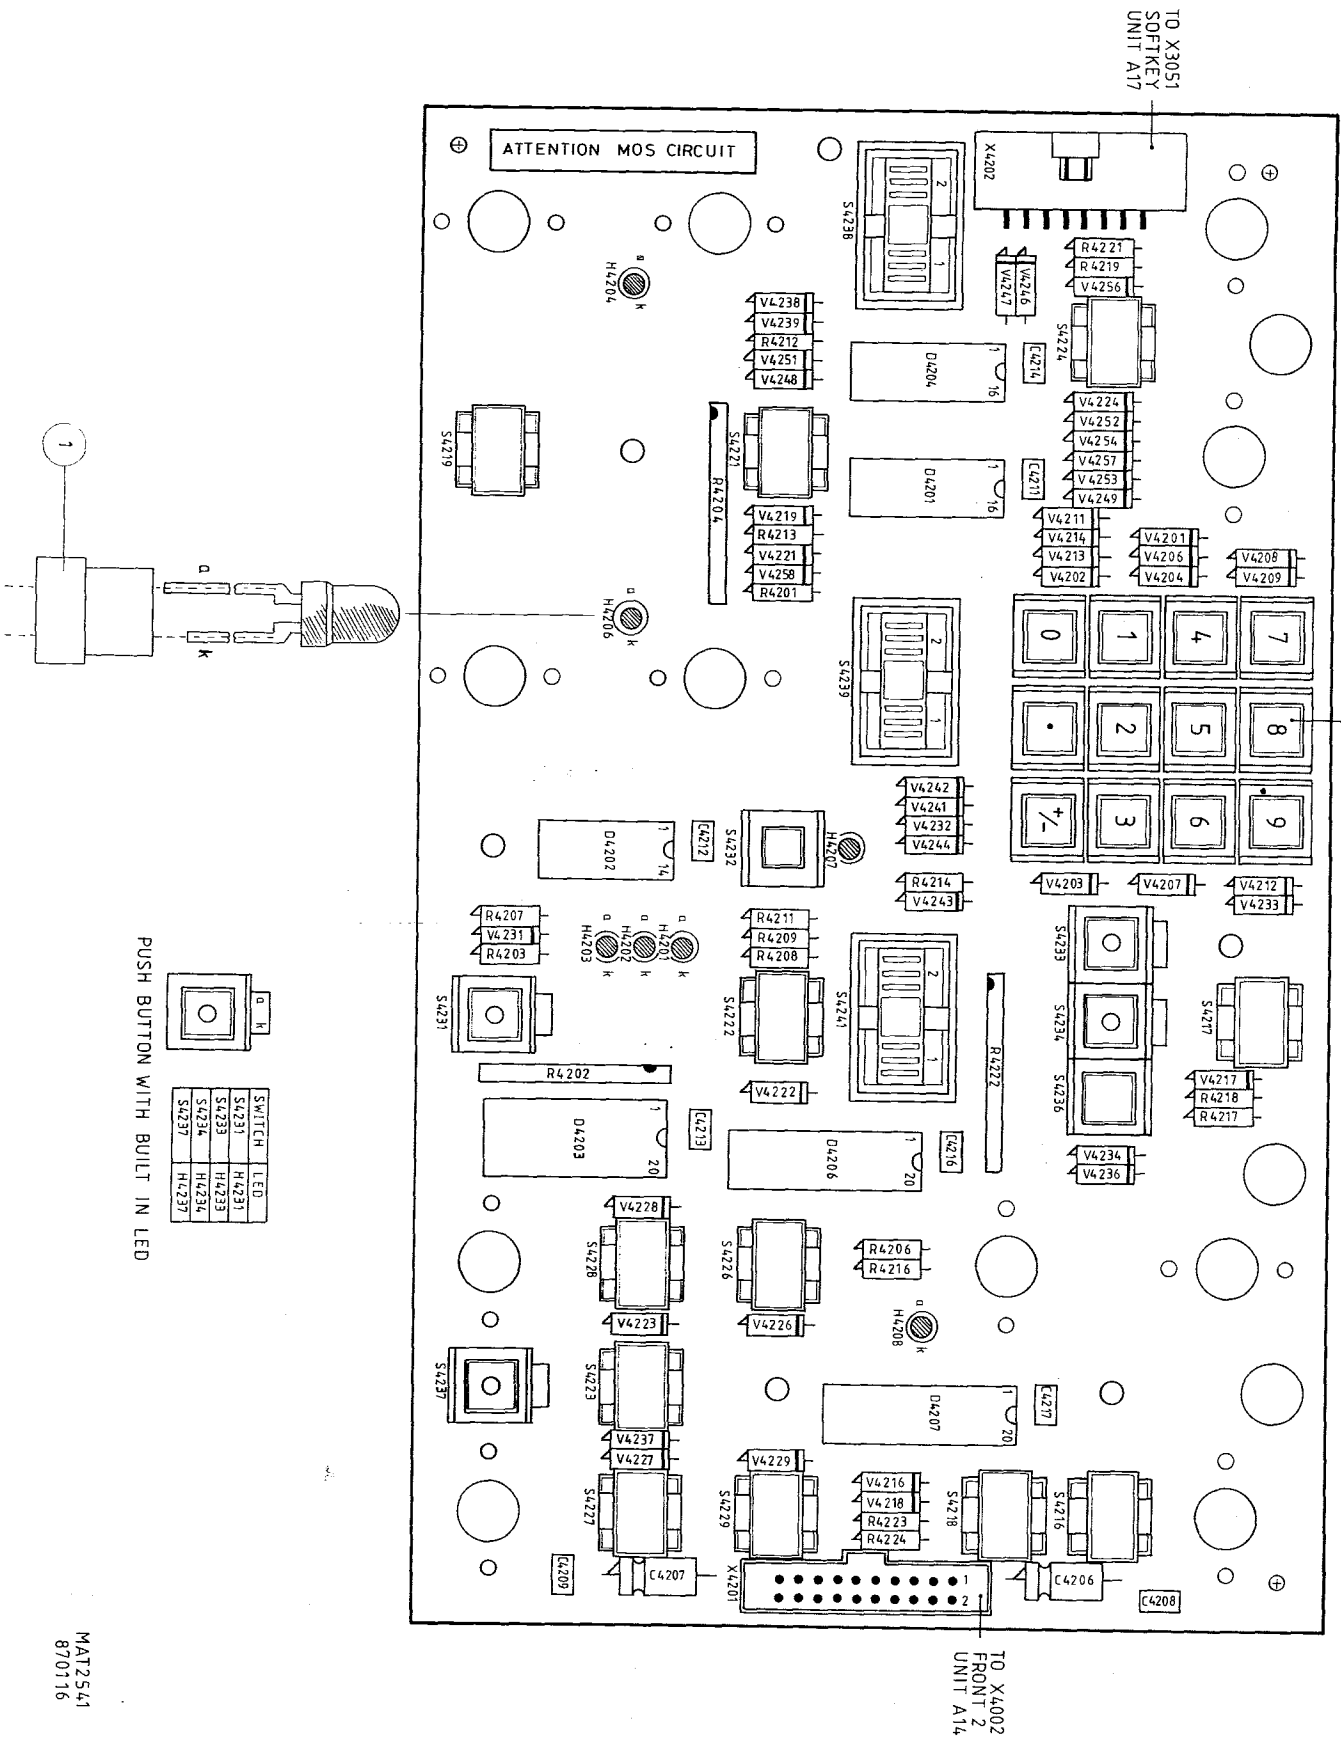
Unit A13 - FRONT 1 - p.c.b. layout.
